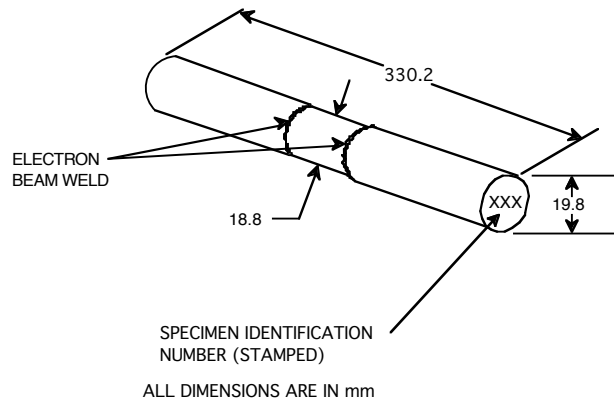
Schematic diagram of electron-beam-welded bar for machining A302-Gr B fatigue test specimens.
